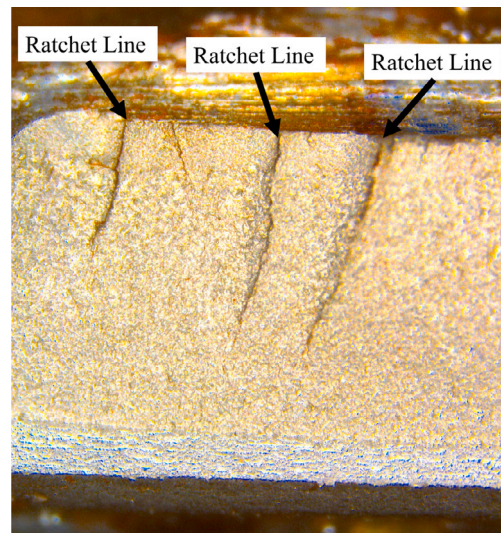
Ratchet lines on fracture surface of specimen no.3.
